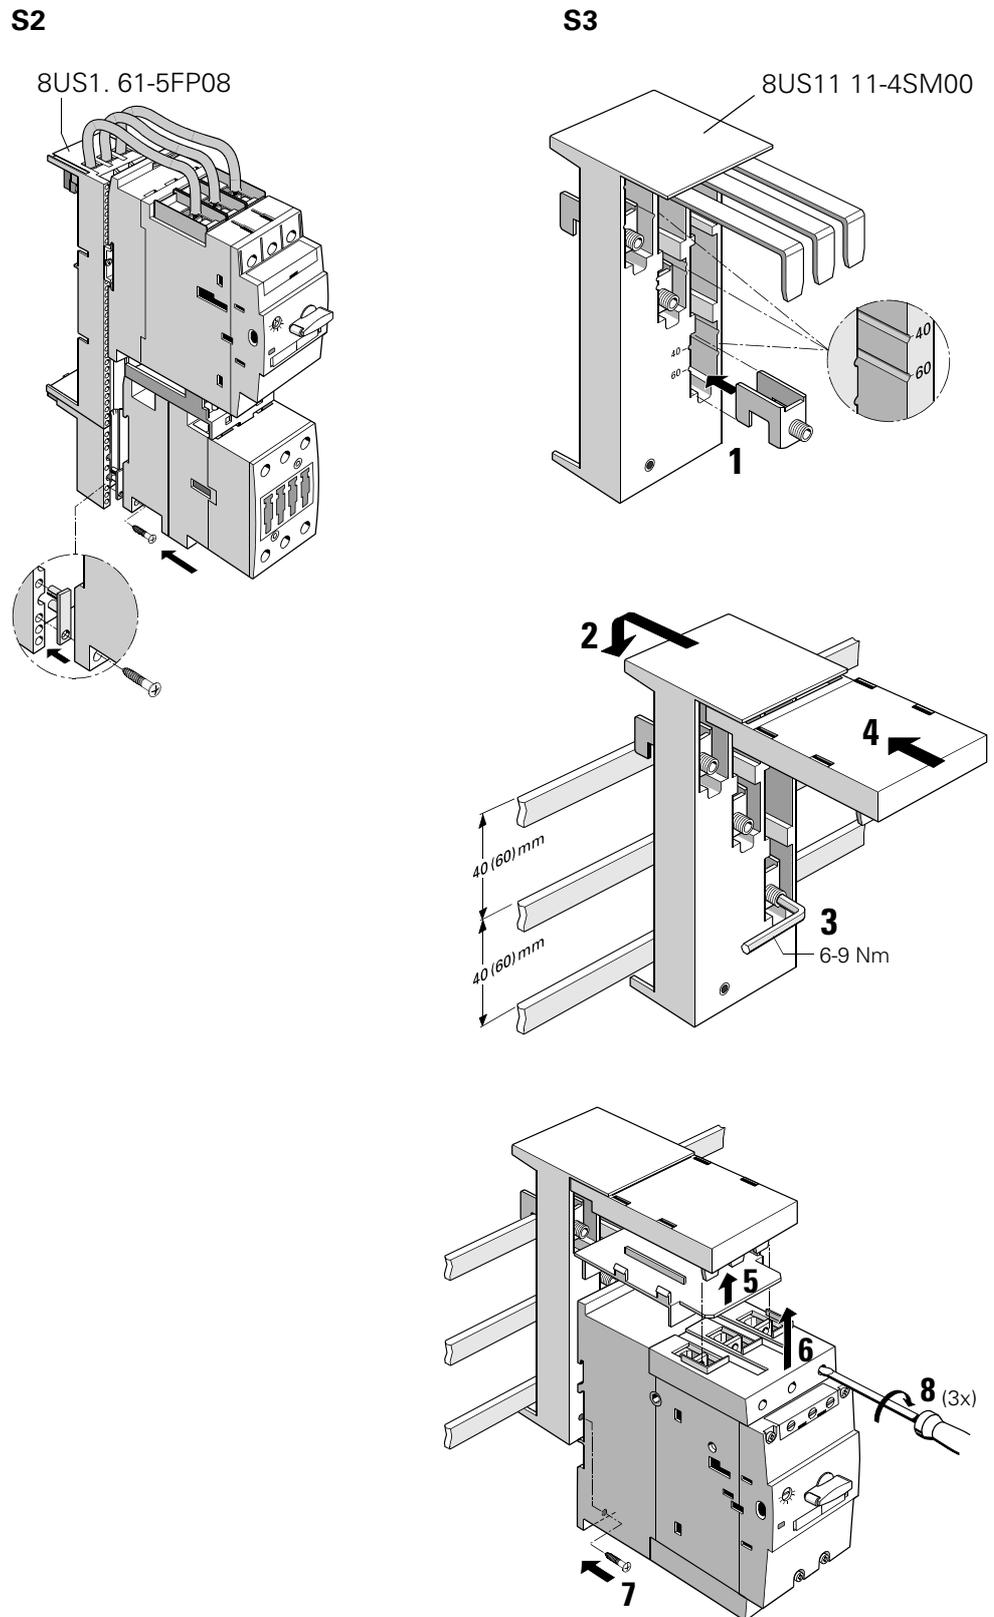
Mounting circuit breakers/MSPs on busbar adapters (frame sizes S2 and S3)
